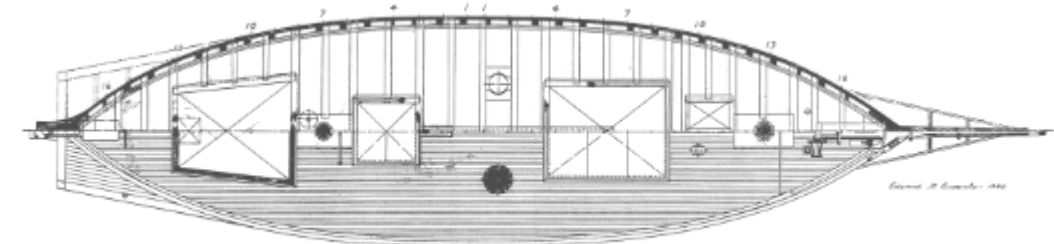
PLATE XVI B. STRUCTURAL PLAN OF FRAME BOGIE Lizzie J. COX
